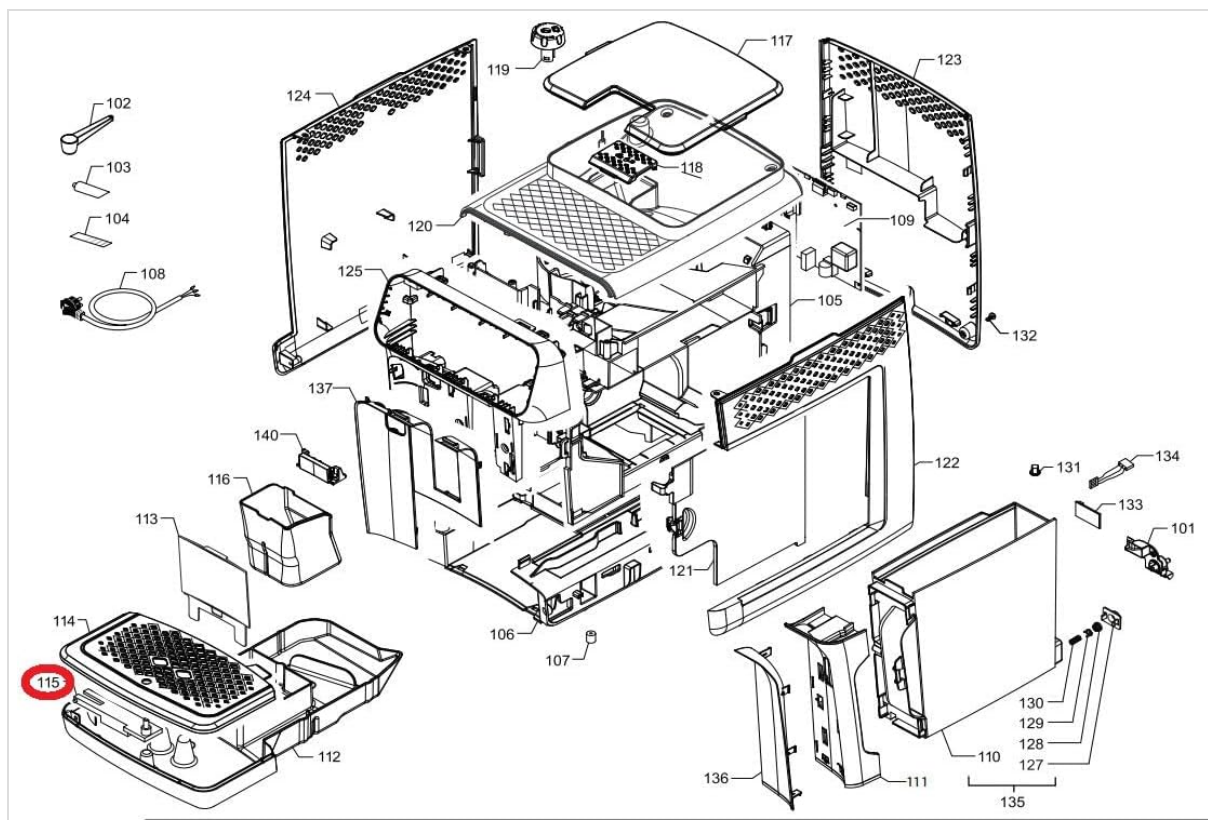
Exploded view of a Philips coffee machine, highlighting the drip tray assembly. The floater (item 115, circled in red) is located within the drip tray (item 112), demonstrating its position for proper installation.
